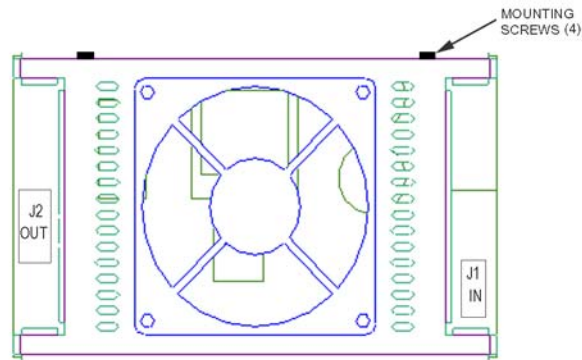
POWER SUPPLY ASSEMBLY.
